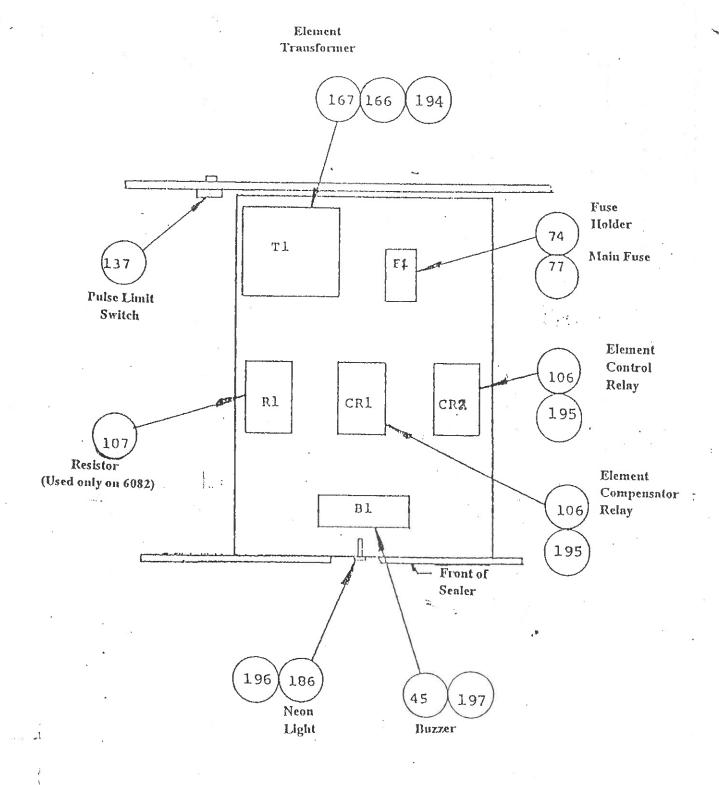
Parts Location, Electrical Chassis Models 6081, 6082, 6001
